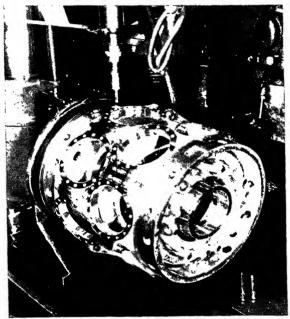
Machining operation on a Pratt and Whitney forged aluminum-alloy crankcase.
